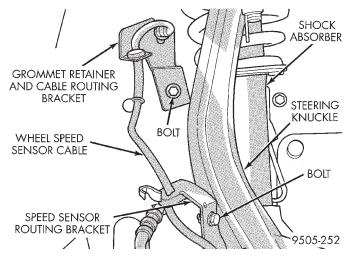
Wheel Speed Sensor Cable Grommet Retainer
